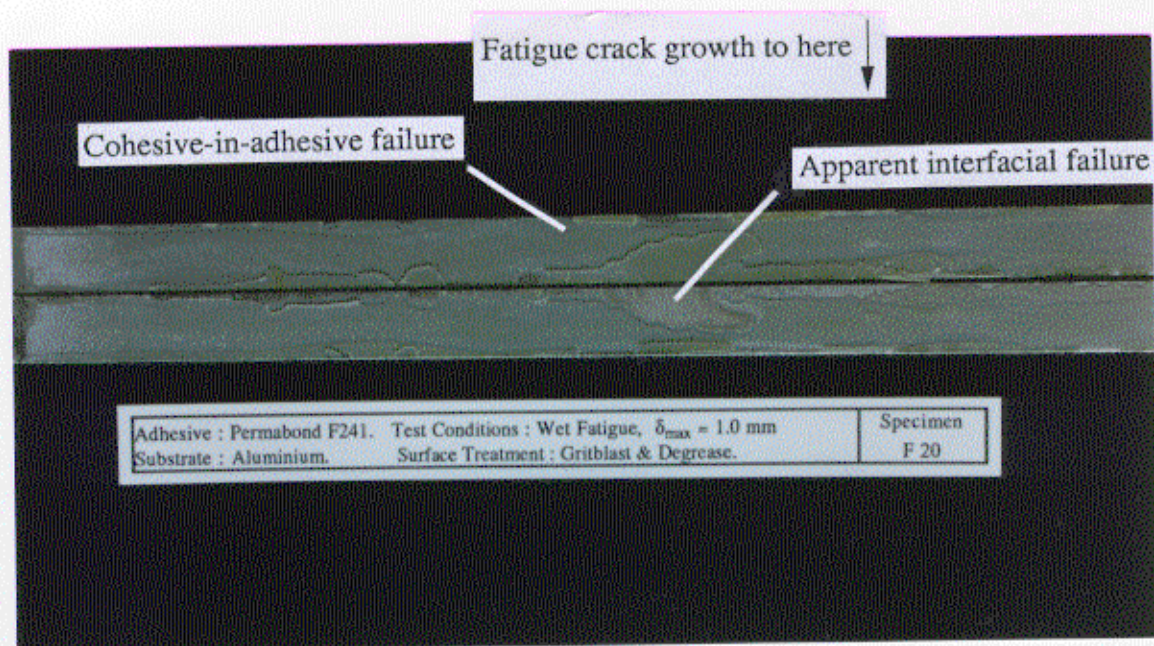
Fracture surface of aluminium specimen bonded with 'F241' with GB/DG surface treatment, tested 'wet', showing areas of cohesive-in-adhesive and apparently interfacial failure.
